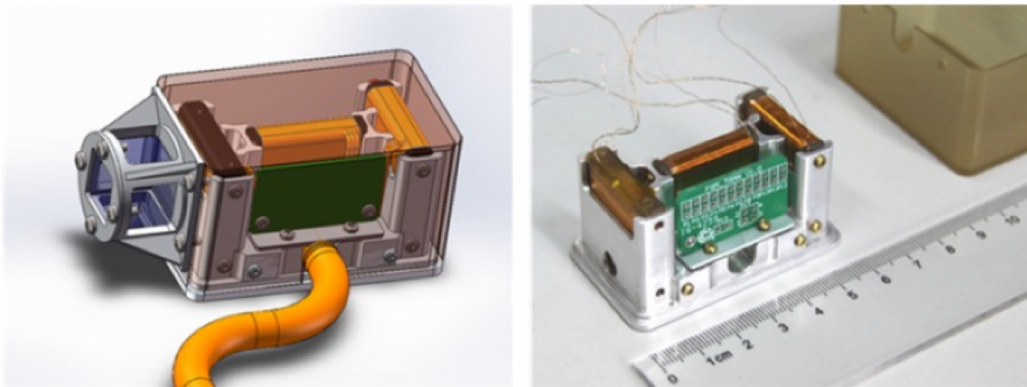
SMILE Magnetometer (MAG) Sensor head.
